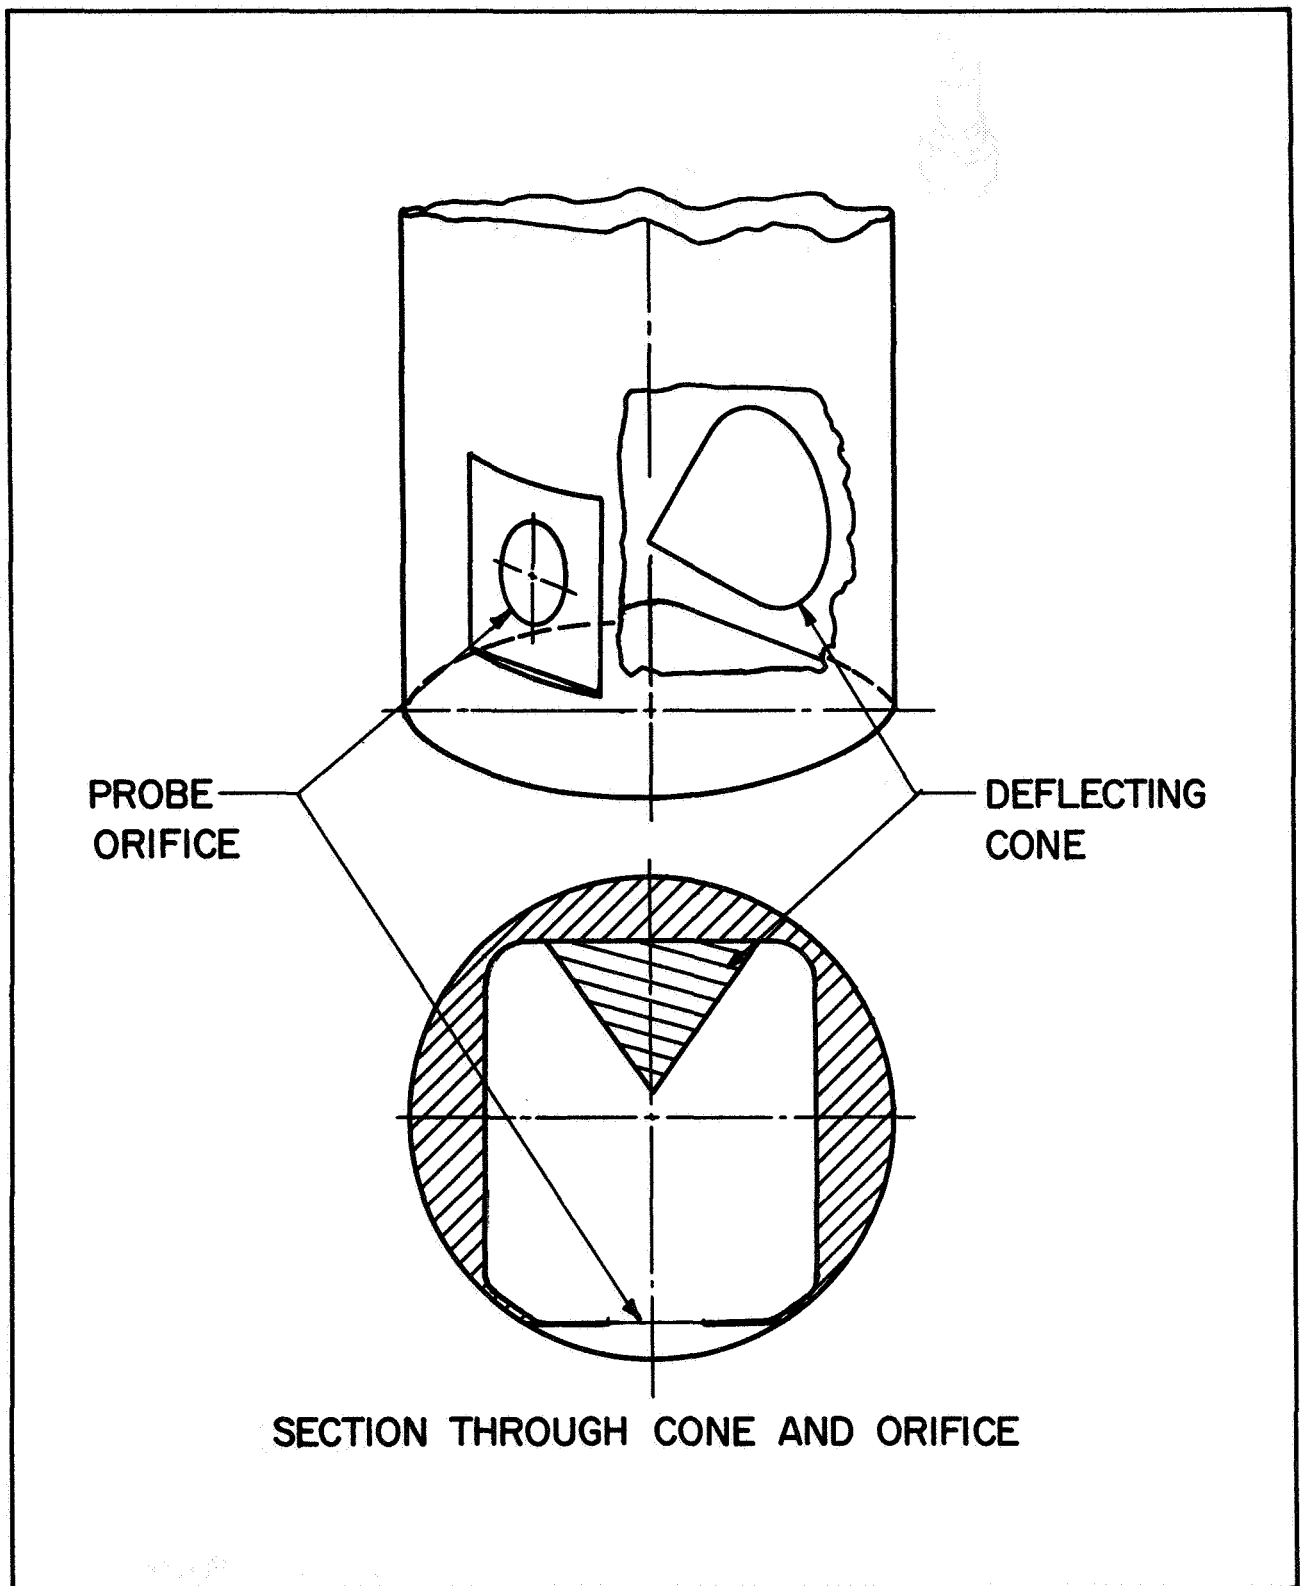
SCHEMATIC OF DETECTOR PROBE ASSEMBLY
